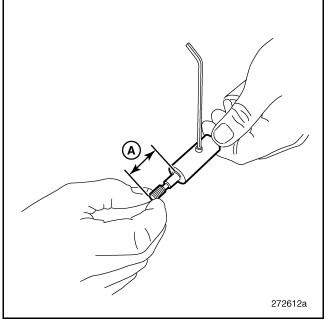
Adjusting Copper Sleeve Extractor Bolt
